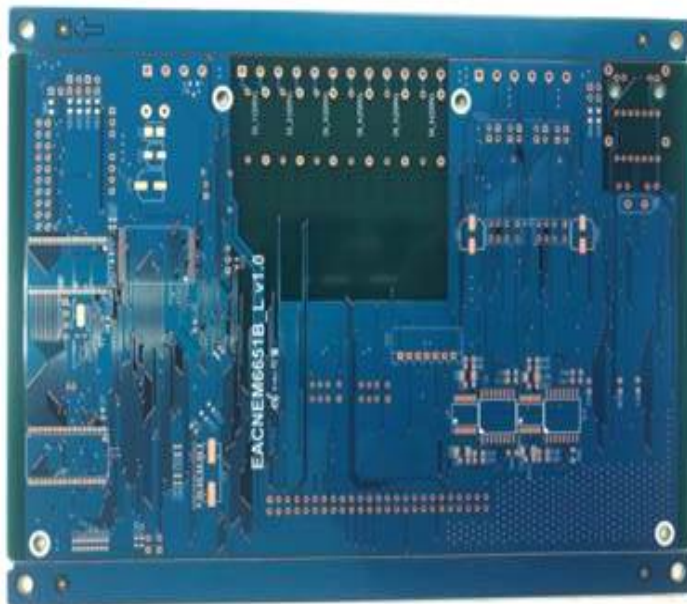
PCB photo on the right side of the SYSTEM(b)
